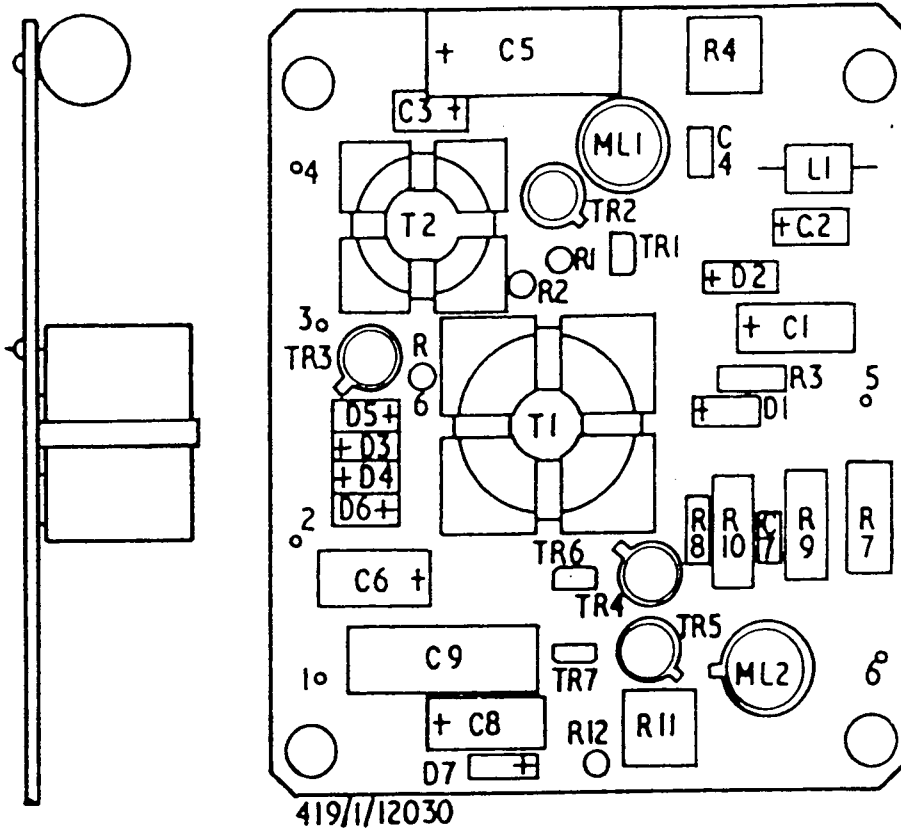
Panel, electronic circuit, ( unit 5b) - component layout
